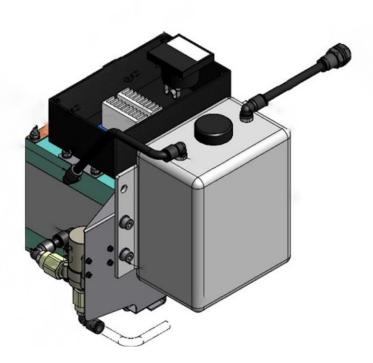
K Series Assembly – This is a representation of one form of assembly. Installers can decide to use tank and bubbler to be installed based on vehicle requirements.
